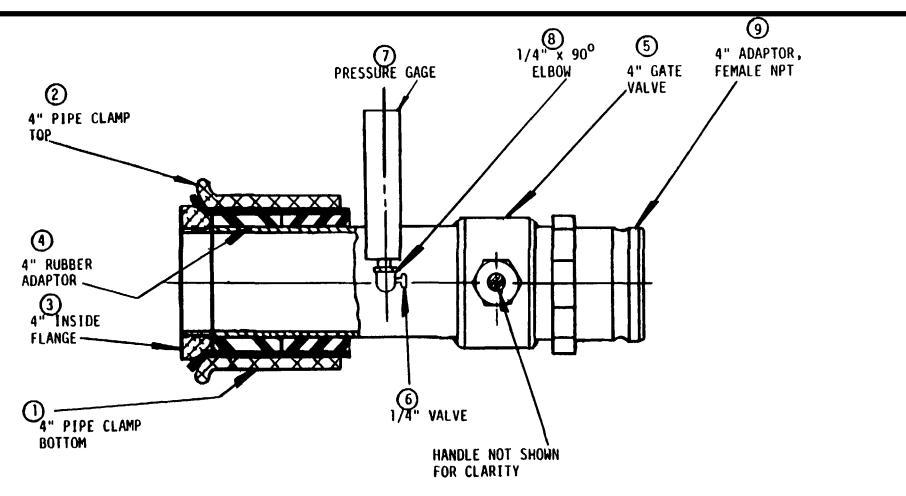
A FILLER/DISCHARGE ASSEMBLY (MODEL 91094)
